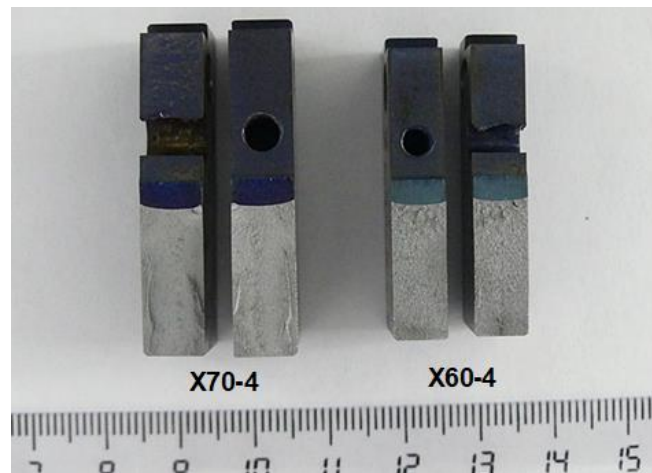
Heat tinted fracture surface of CT-WOL specimens after the 100 mol% H₂ campaign
